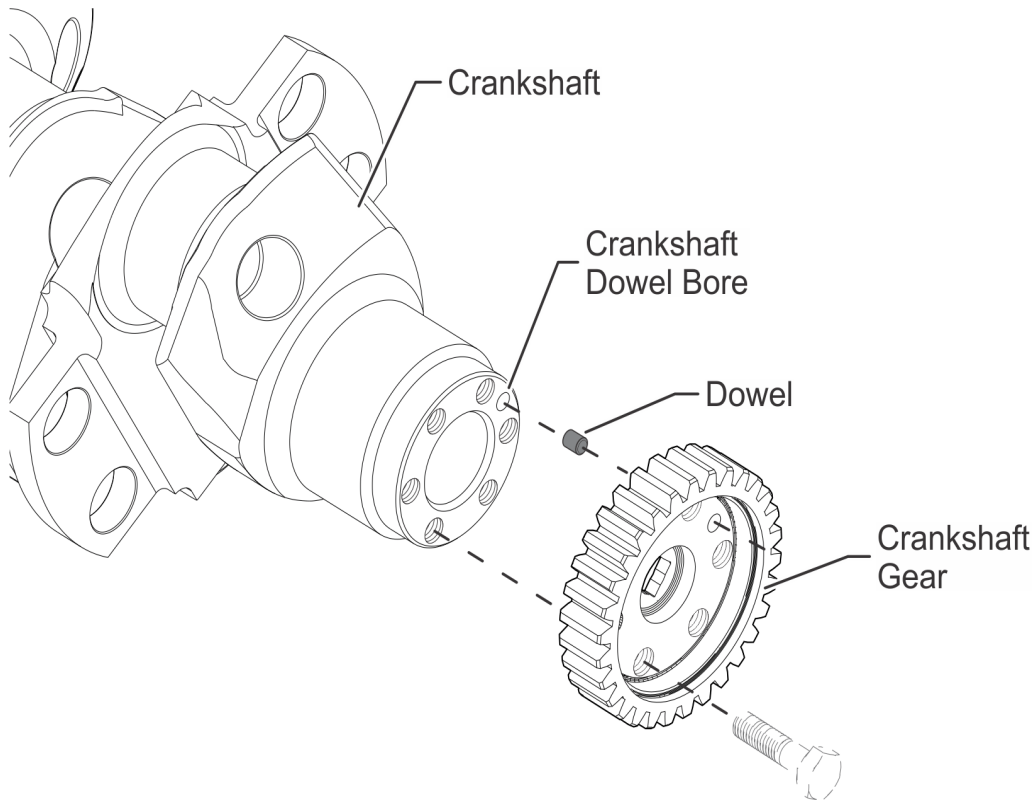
Crankshaft Dowel Bore and Dowel Locations, typical
